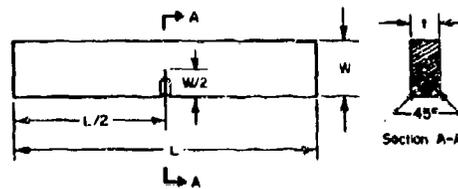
SLOW BEND FRACTURE TOUGHNESS SPECIMEN
